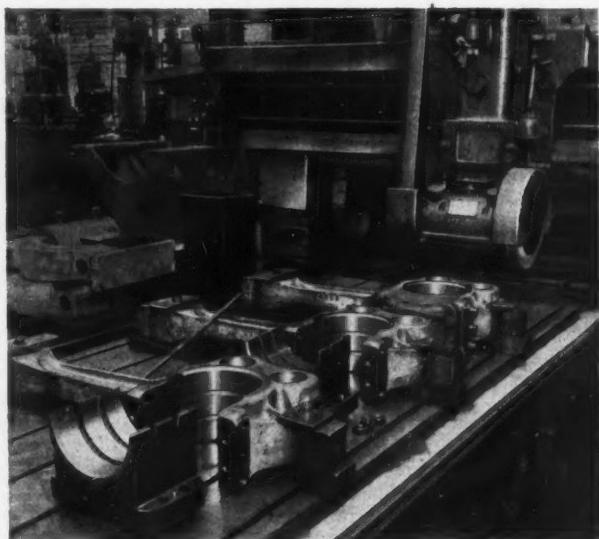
To relieve the cheek faces of steel connecting rods below the level of the associated cast-iron bearing caps, a grinding operation is performed on this Churchill double-column machine
